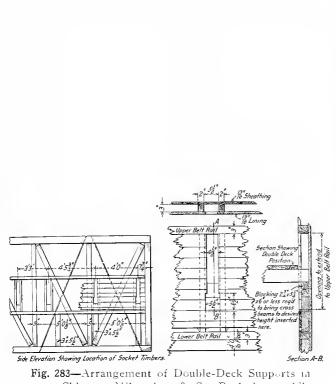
Arrangement of Double-Deck Supports in Chicago, Milwaukee & St. Paul Automobile Car Shown in Figs. 282 and 284.
